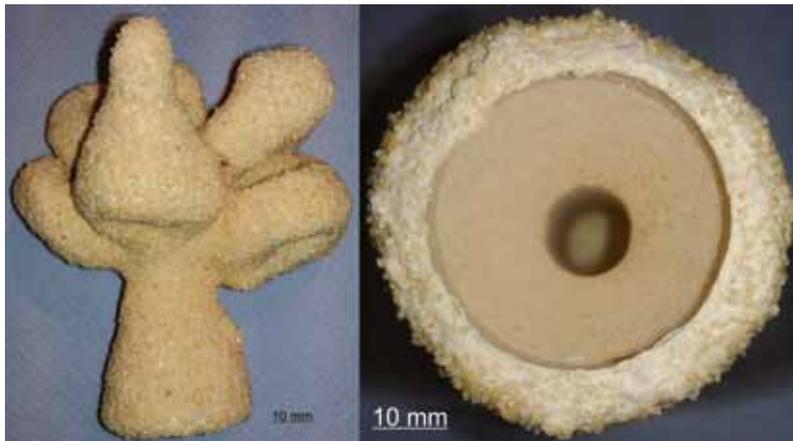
CaZrO₃ investment casting mould for jewellery casting: mould (l.), inner surface (r.)
